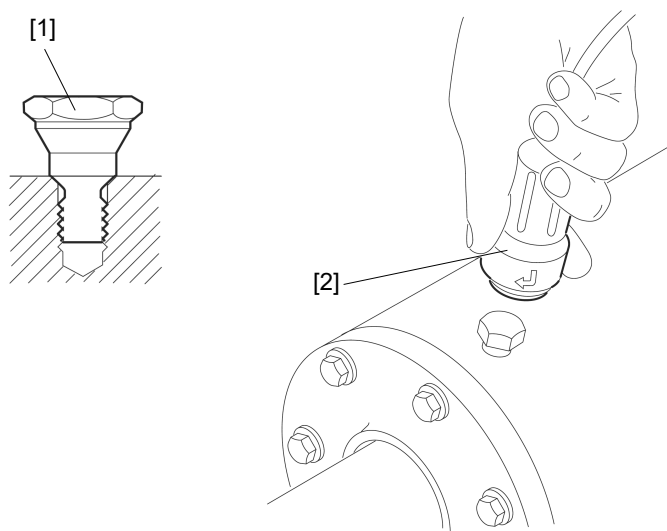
Mounting the shock pulse sensor onto the SPM adapter
